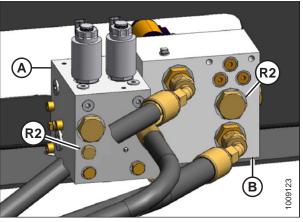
Valve Blocks without Reverser Valve in Factory Configuration
